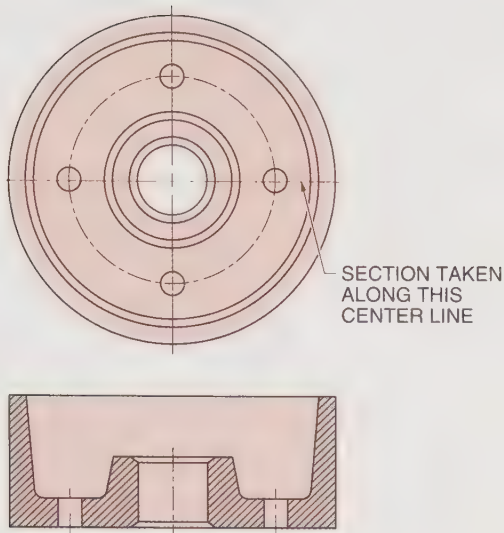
The cutting plane may be omitted if a section is taken along a major center line.
